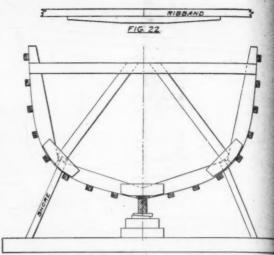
When building on uneven ground use long cross pieces and build up the keel supporters to the required height Fig. 22 (above-) How to splice a ribband
